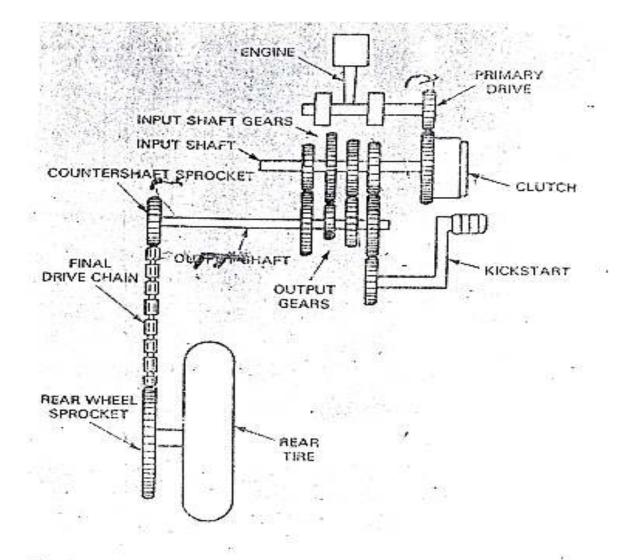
This illustration shows main components of a motorcycle drive train, in particular, note two gearbox shafts.
